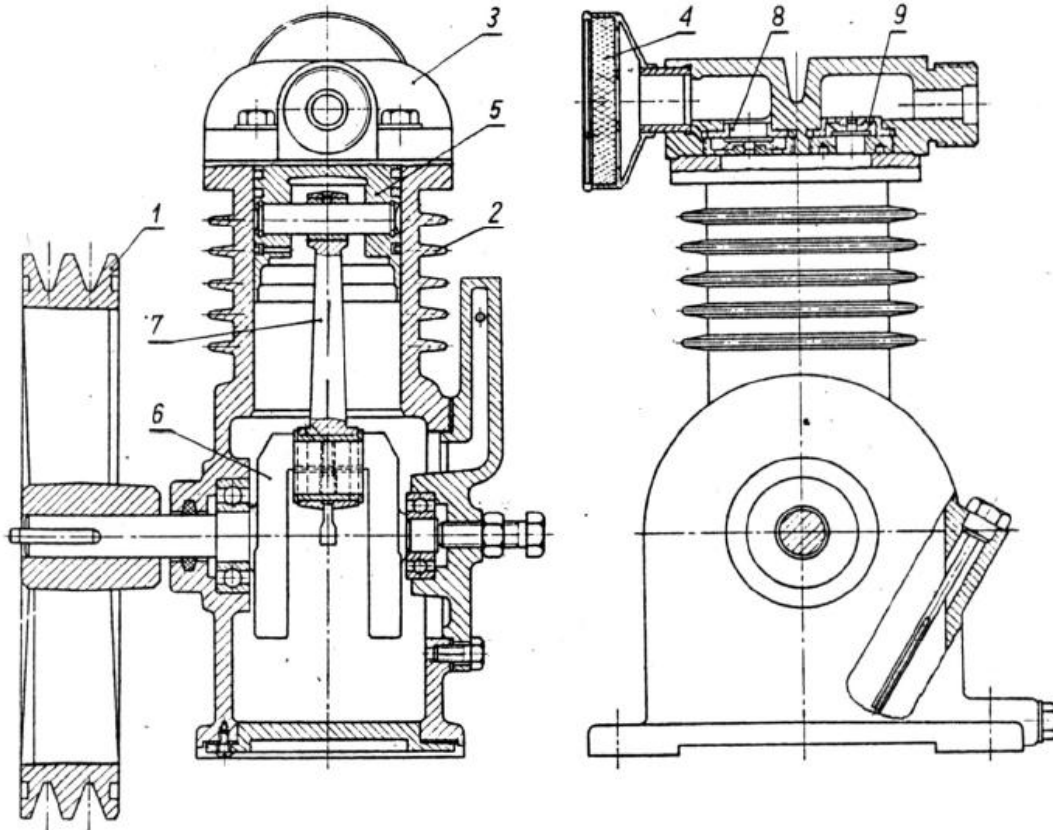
One-cylinder piston compressor (our object of study): 1 - belt pulley with teeth, 2- cylinder, 3 - head, 4 – air filter, 5 - piston, 6 - crankshaft, 7 – connecting rod, 8 – inlet valve, 9 – outlet valve
